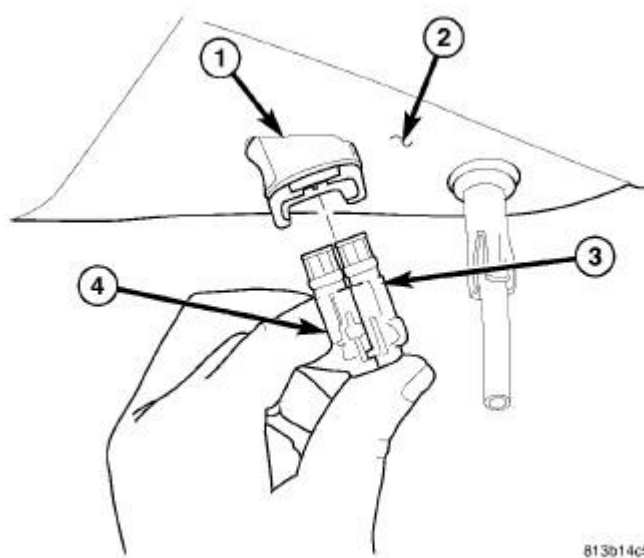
SENSOR CONNECTION TO BODY CONNECTOR
